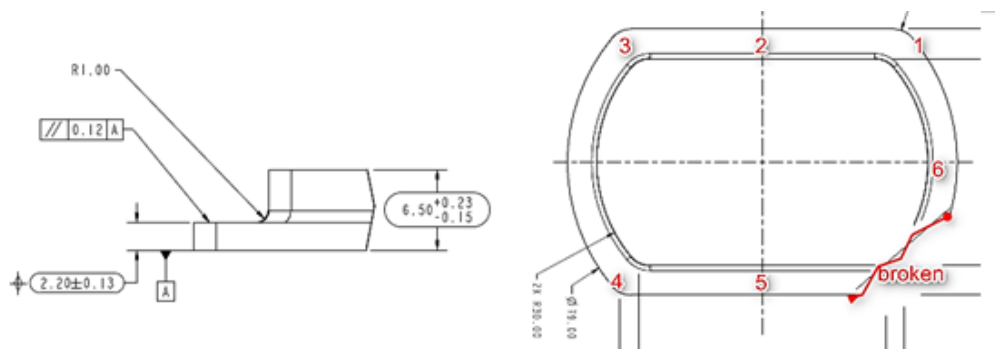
Preferred corner and dimensional tolerances
